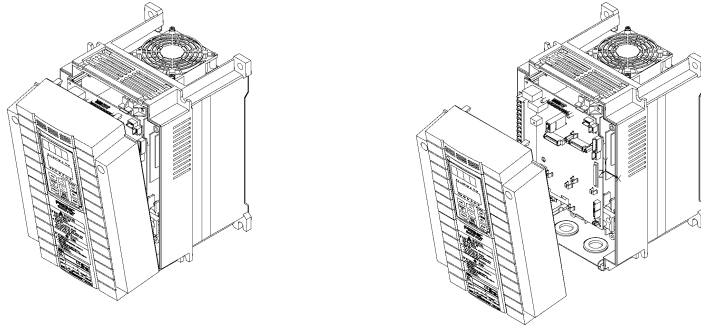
Removal of Surface Cover (15 kW or lower)
